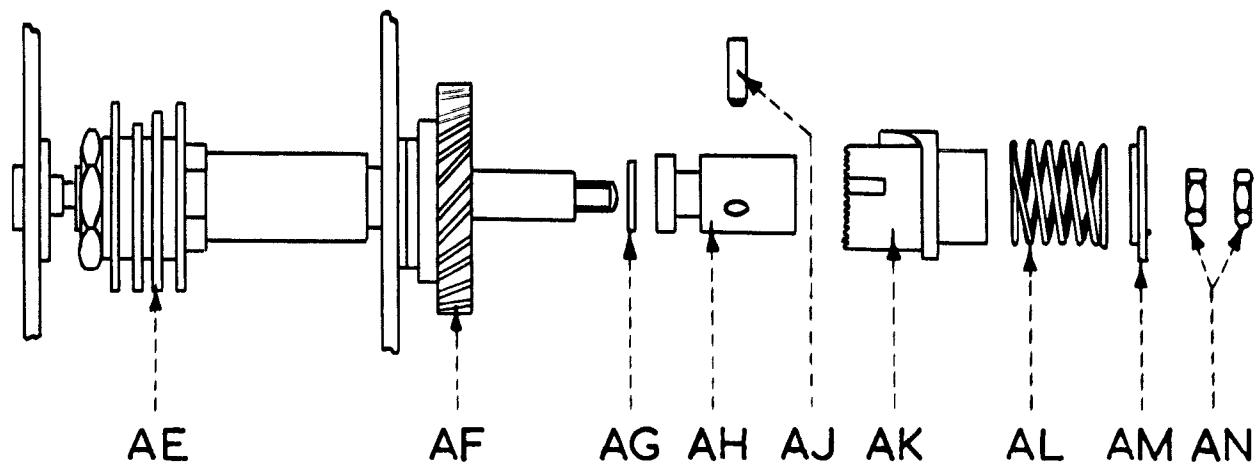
CAMSHAFT ASSEMBLY (EXPLODED VIEW)
